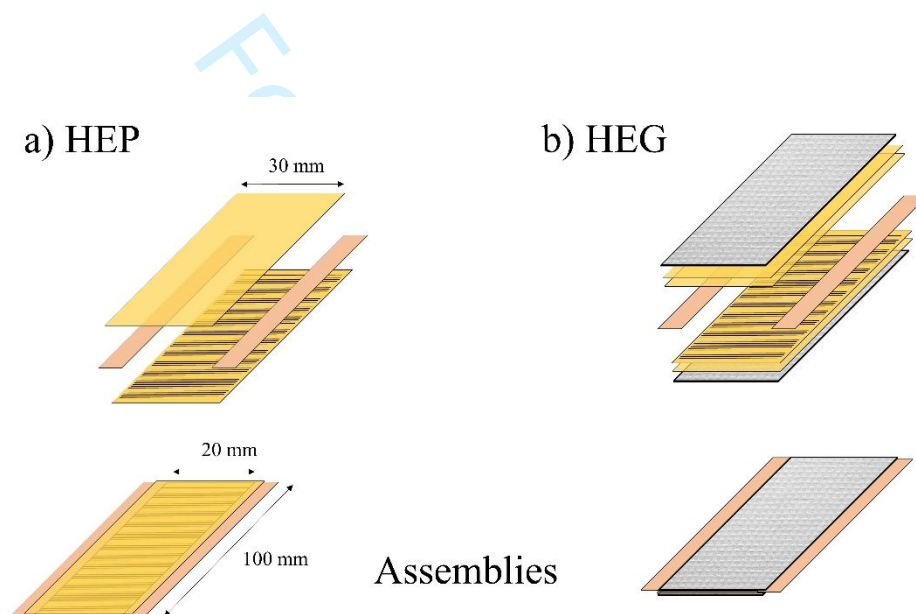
Exploded view of a) HEP and b) HEG heating elements.
